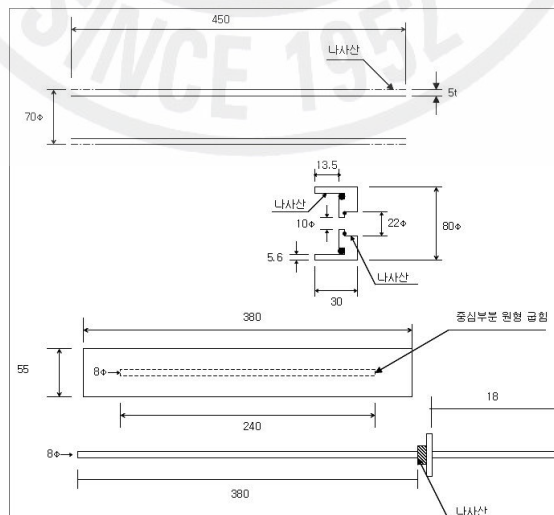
Manufacturing drawing of nonglass vacuum solar collector.
